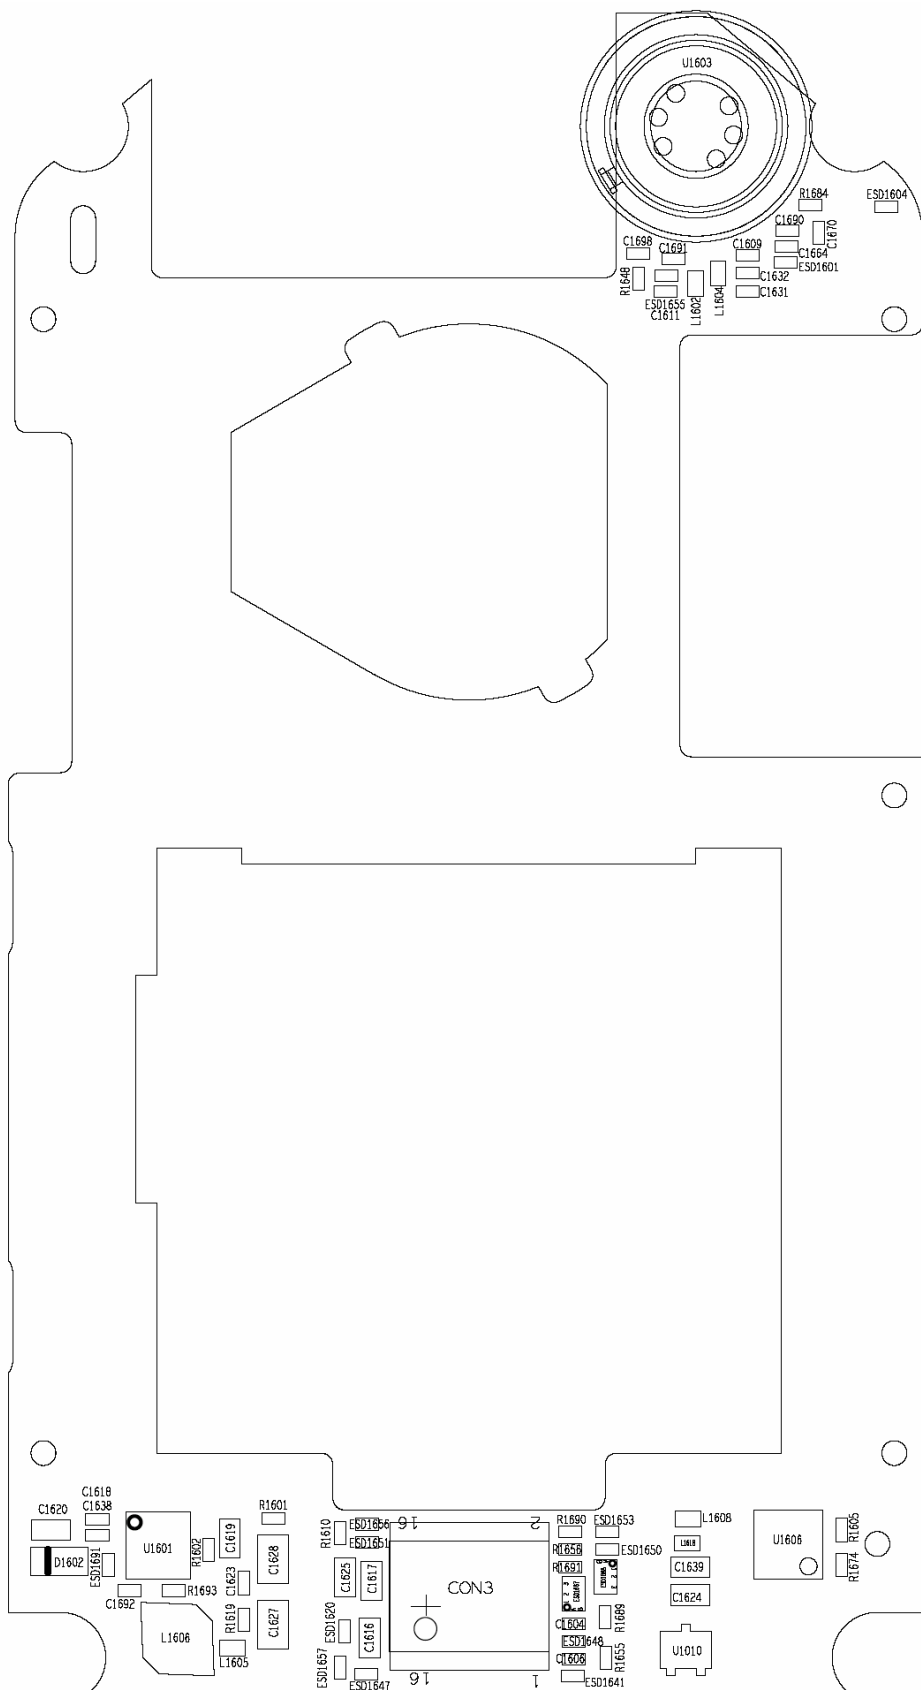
Mendelssohn Key Component Placement (Upper board top view)
